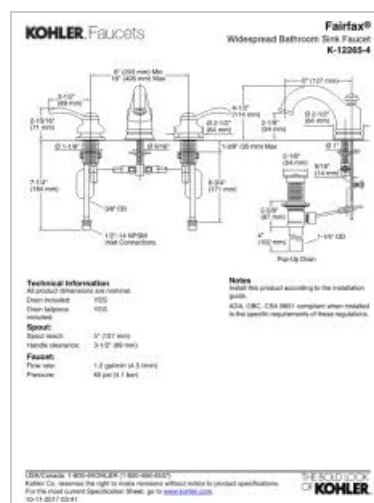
Technical drawing illustrating the dimensions and components of the Kohler Fairfax Widespread Bathroom Sink Faucet (K-12265-4 model shown, similar to K-12265-4-2BZ).
